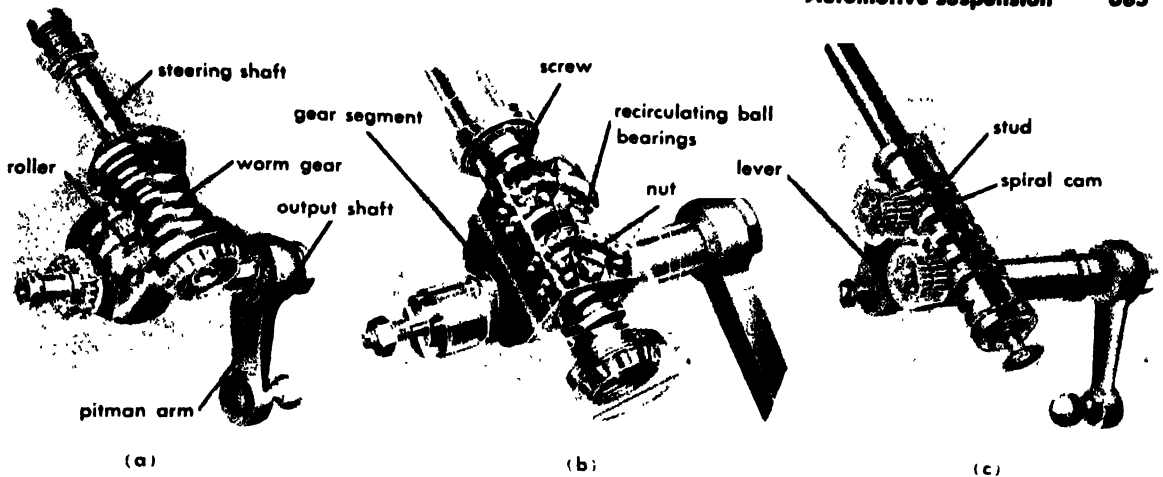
Three common steering gears. (a) Ross-Gemmer worm and roller. (b) Saginaw screw and nut.
